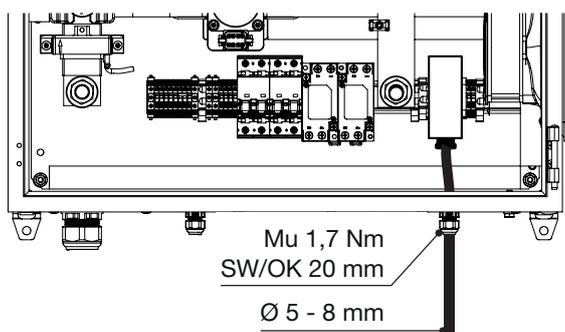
Connection of Ethernet cable (Mu – tightening torque, SW/OK – mounting wrench size)
